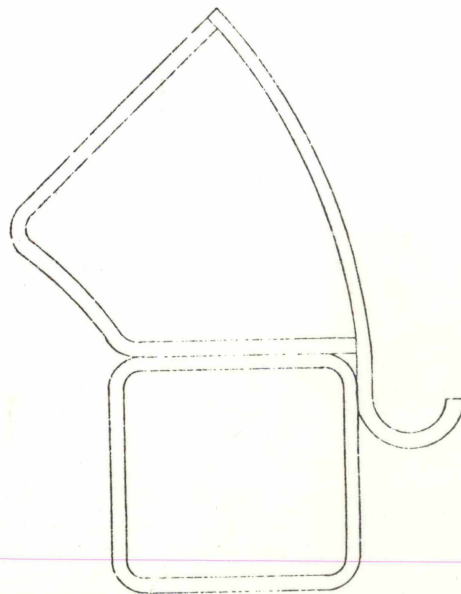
MULTIPLE CLOSED SHAPE MEMBER CROSS-SECTION
